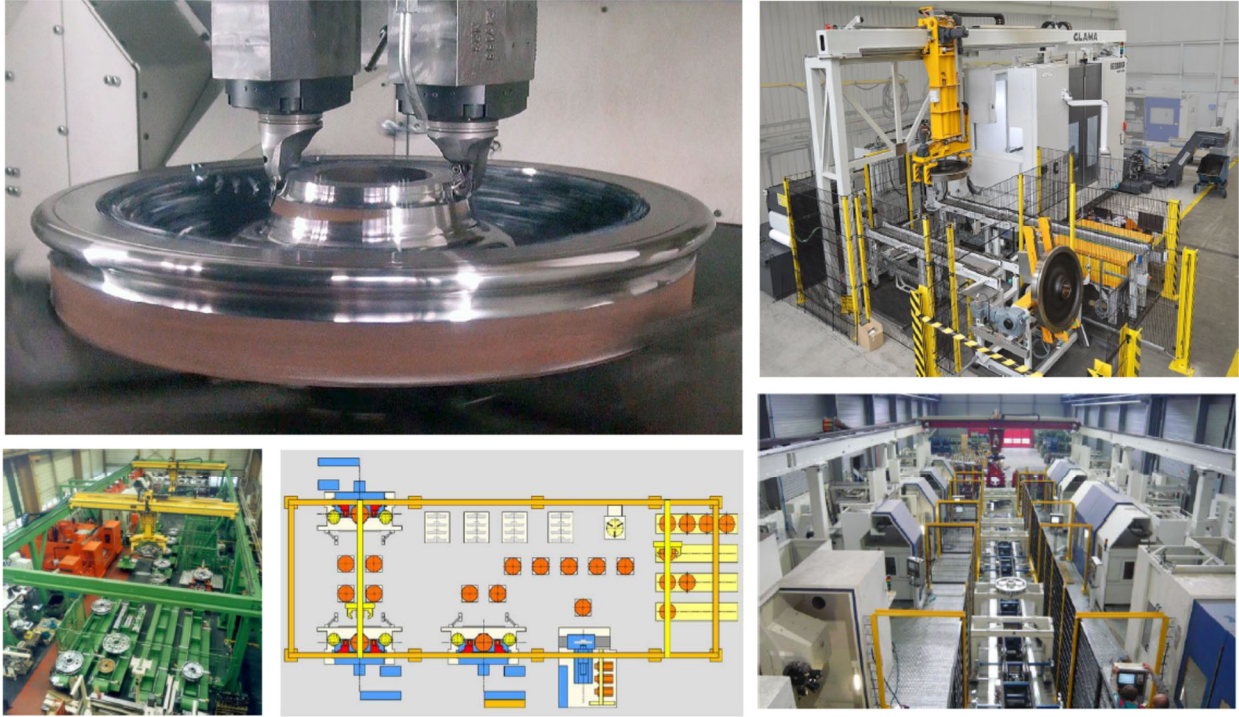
Power Pack VDM 1600 - Vertical turning machine for wheel machining as a manufacturing cell (top right) or manufacturing system for the production of ready-to-install wheels (bottom - Lucchini, CAF)
